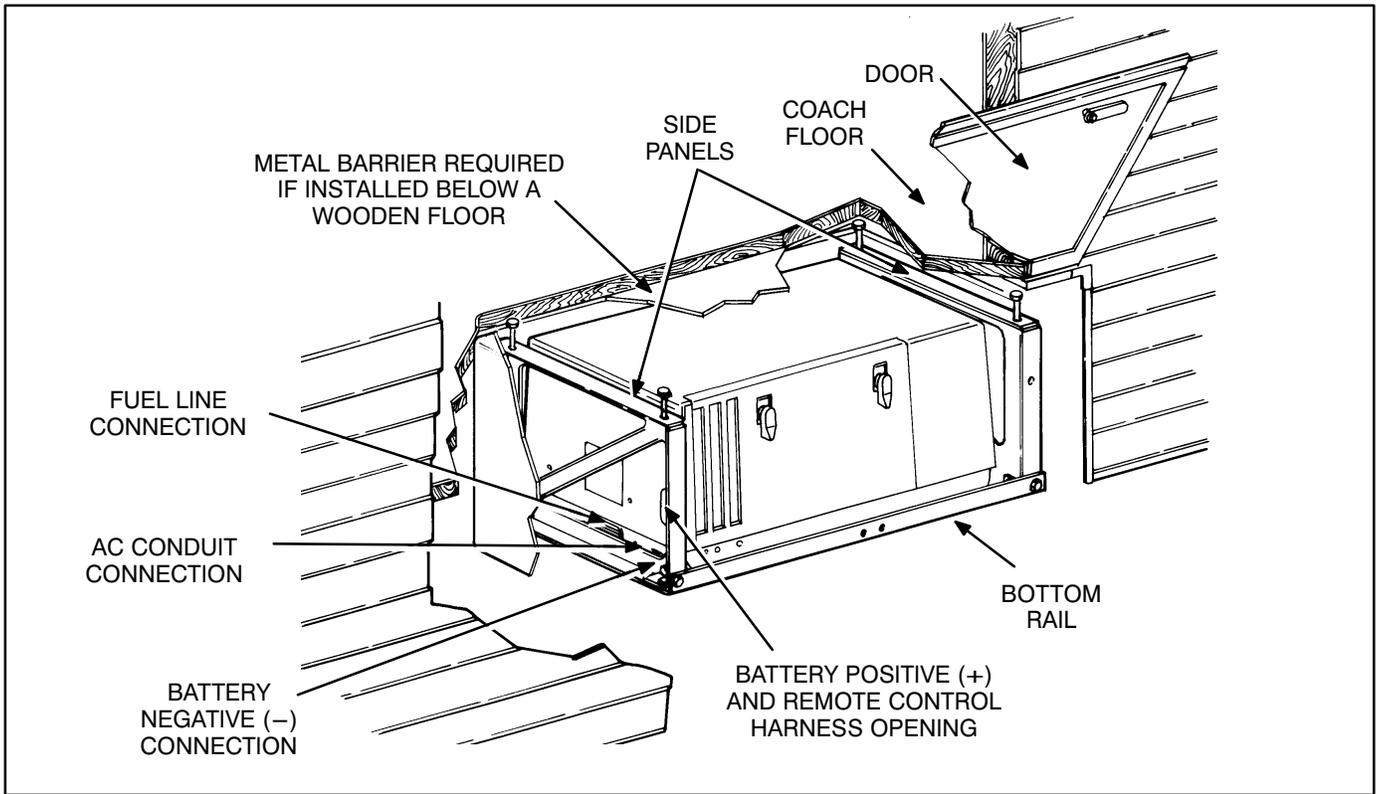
TYPICAL UNDER-FLOOR MOUNT INSTALLATION
